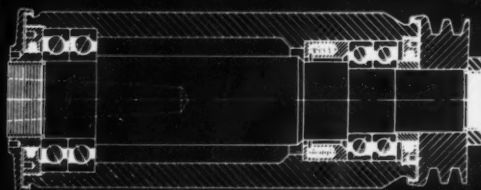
Two bearings in parallel divide the load equally and thus double the rigidity
